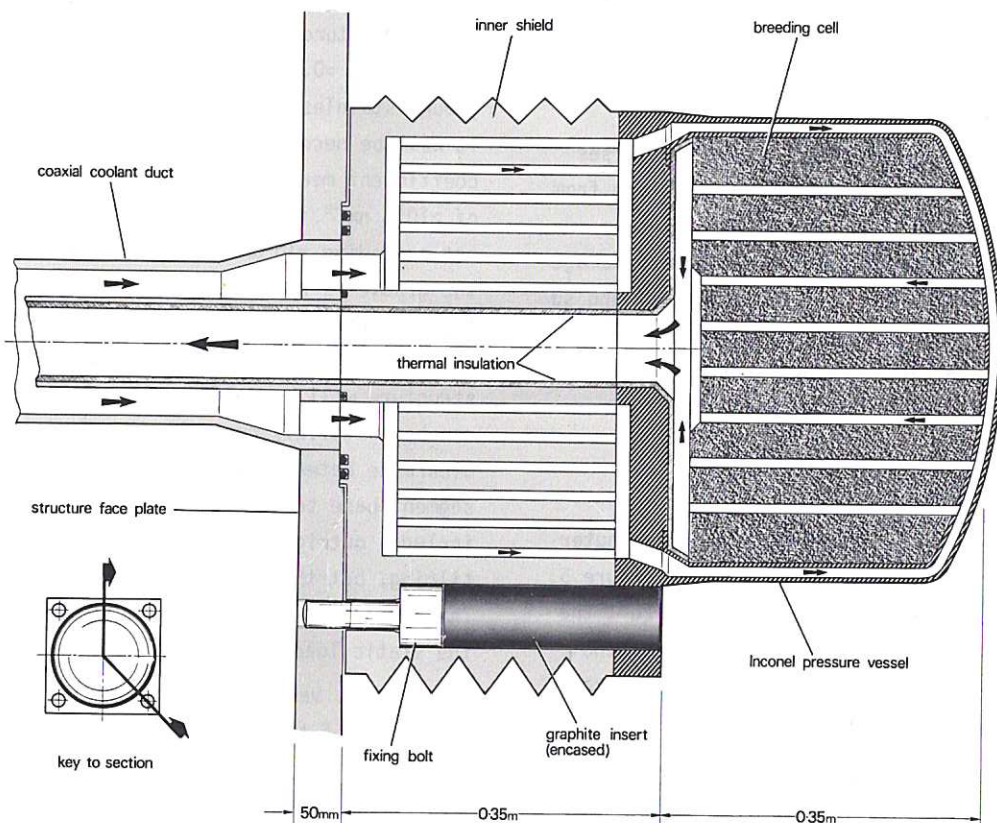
Conceptual design of helium cooled blanket breeding cell and inner shield.
